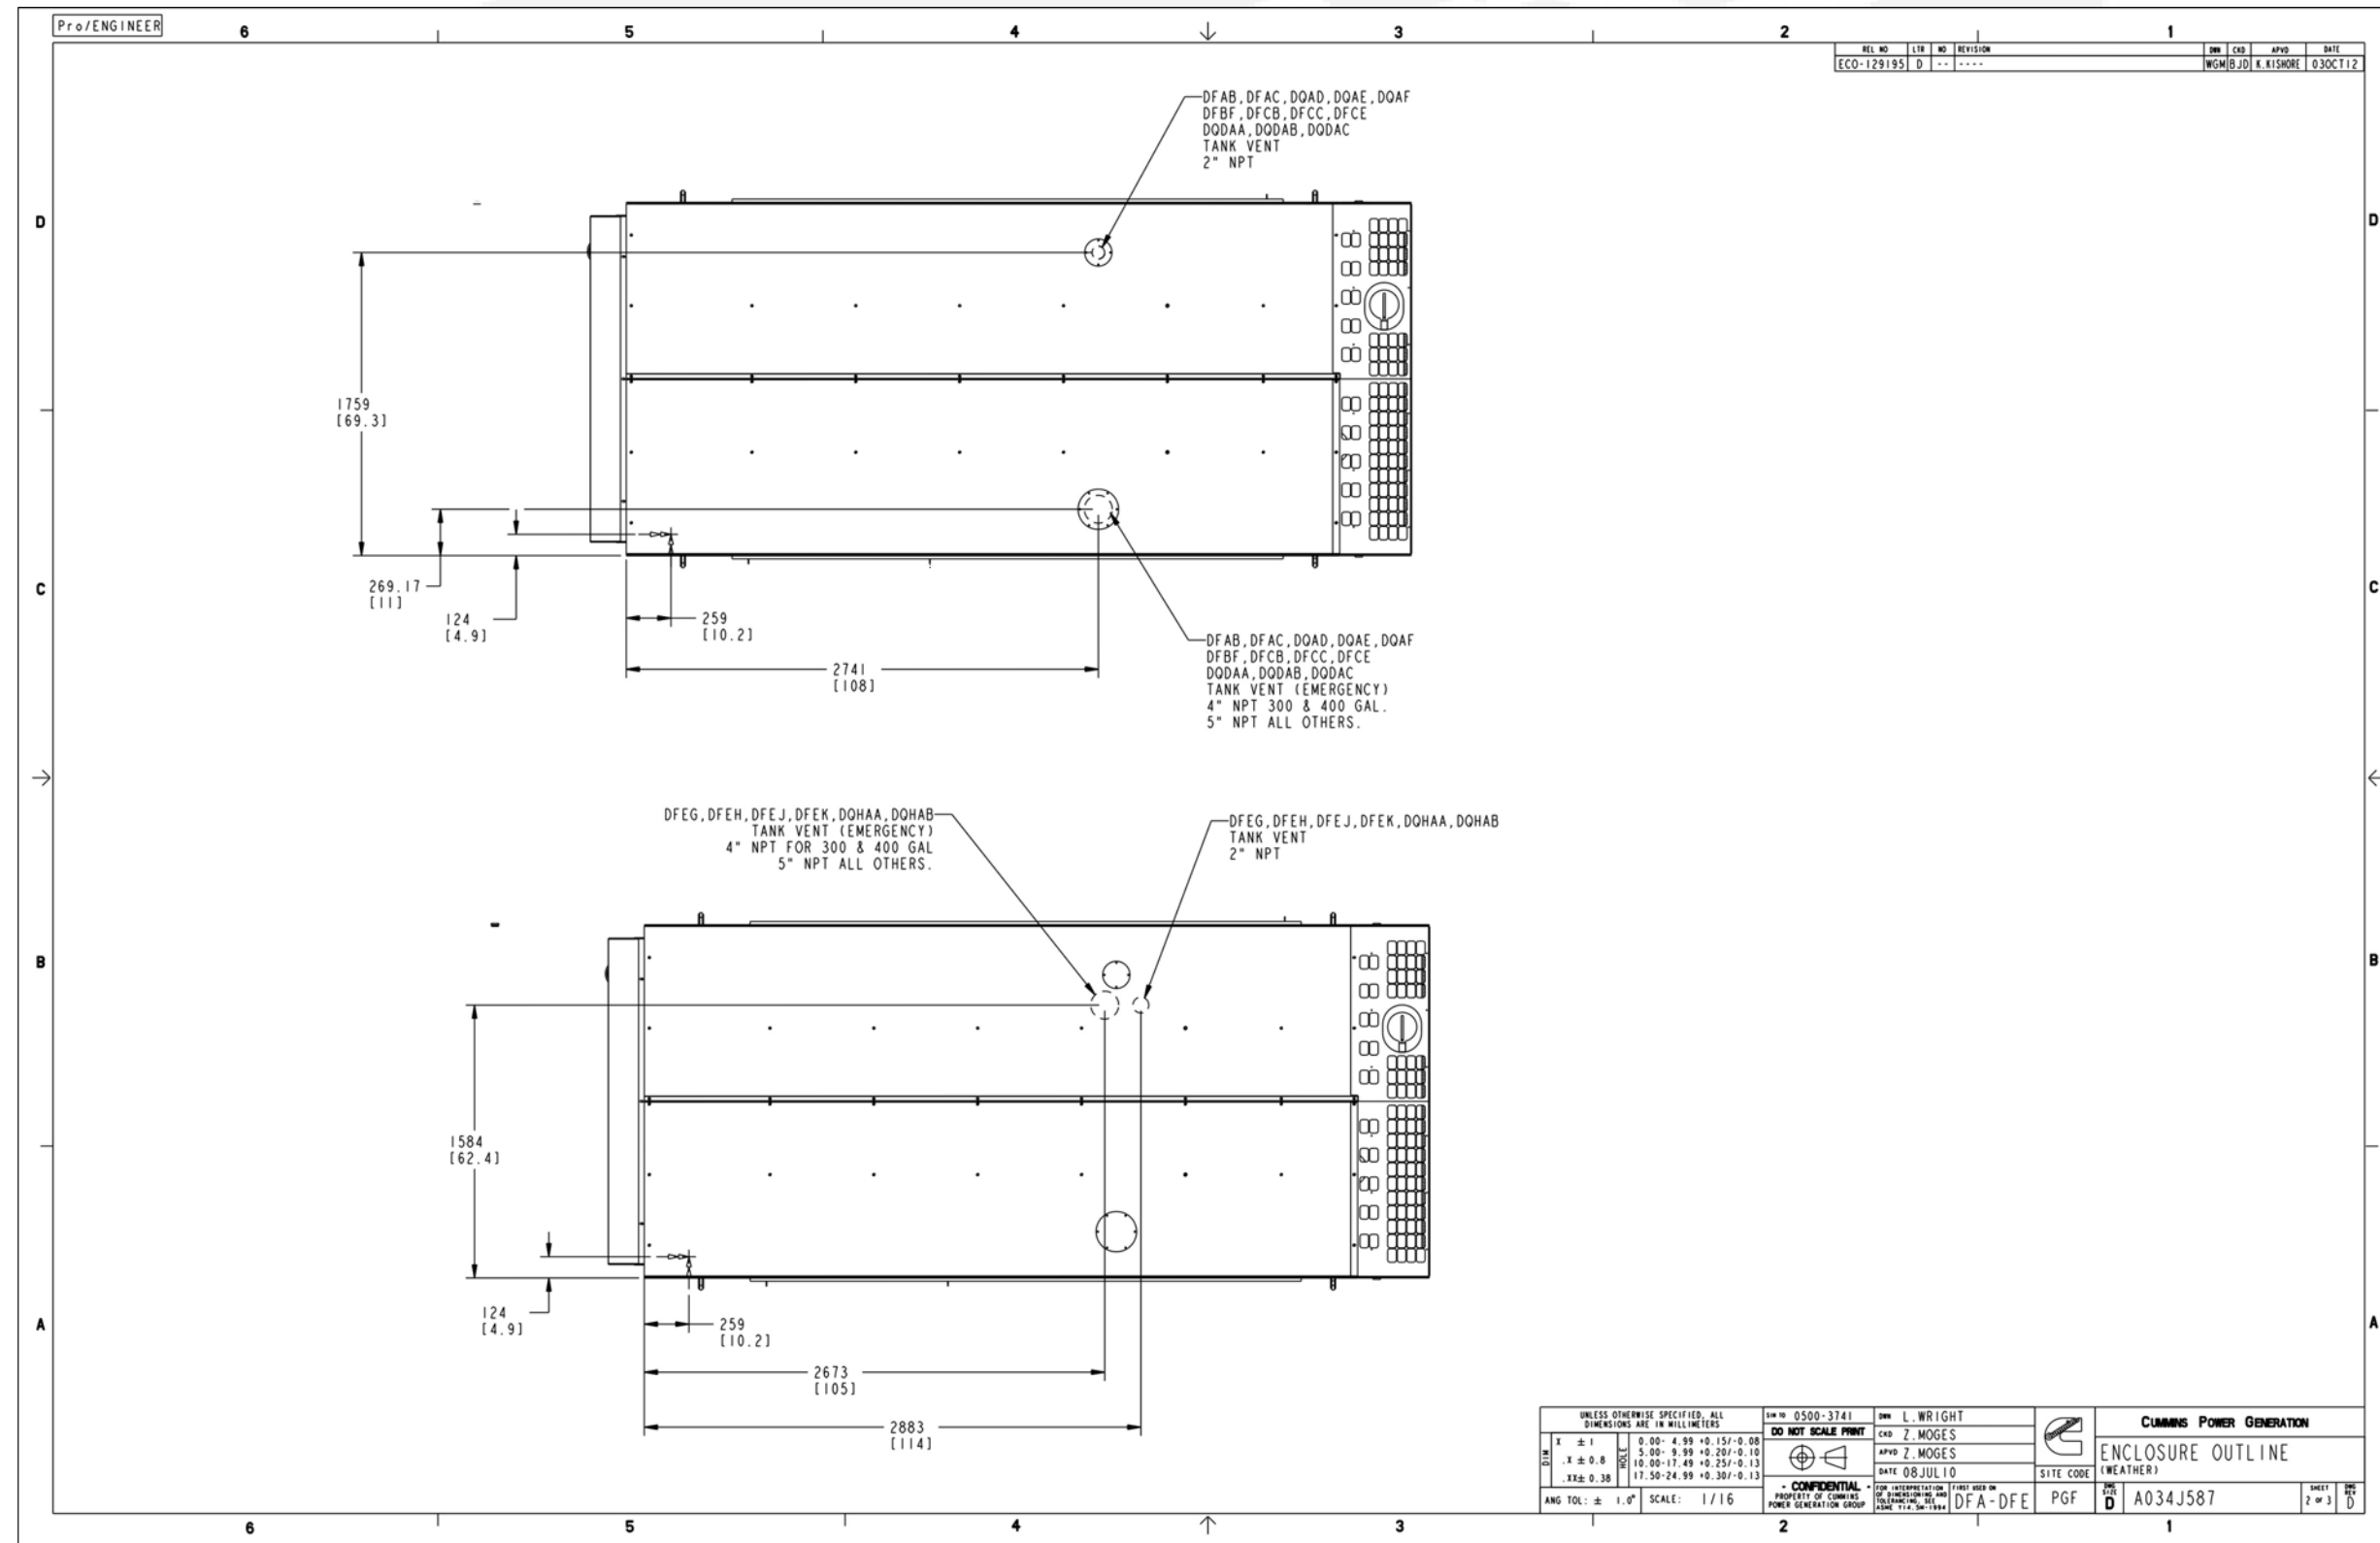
ENCLOSURE OUTLINE DRAWING (WEATHER) (SHEET 2)
